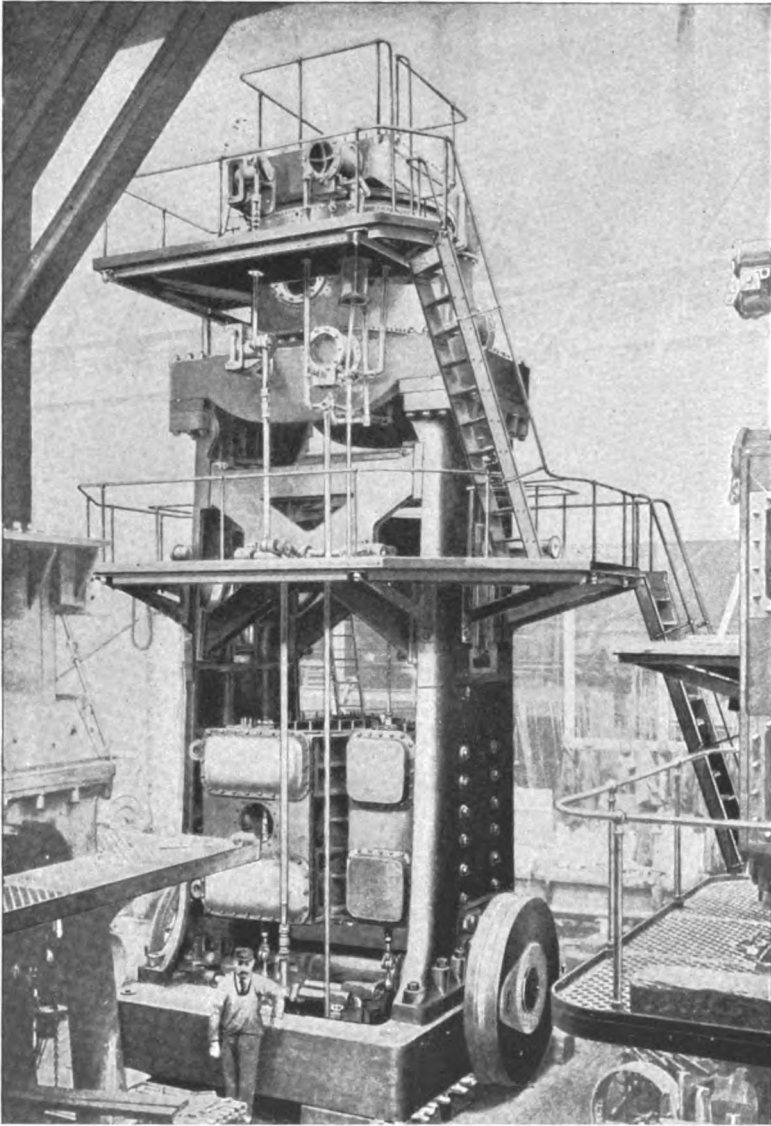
VERTICAL BESSEMER COMPOUND CONDENSING BLOWING ENGINE, WITH POSITIVE INLET AND AUTOMATIC OUTLET AIR-VALVE GEAR, BUILT BY THE SOUTHWARK FOUNDRY AND MACHINE CO.
